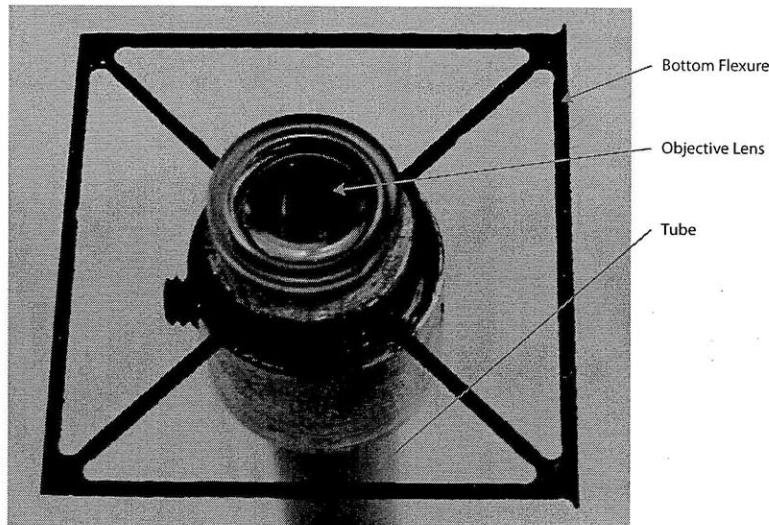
Bottom flexure and objective lens glued to the extension tube.
